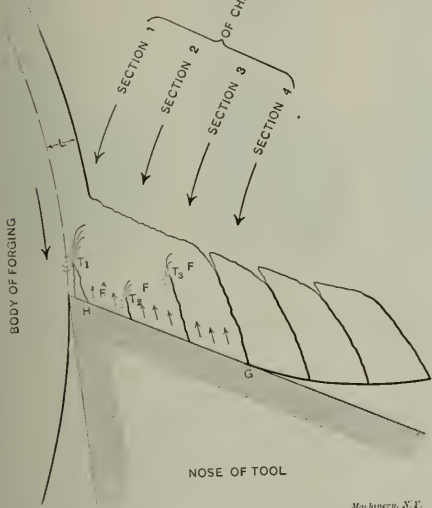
Showing how Chip is Partly Torn and Partly Sheared from Body of Forging.
